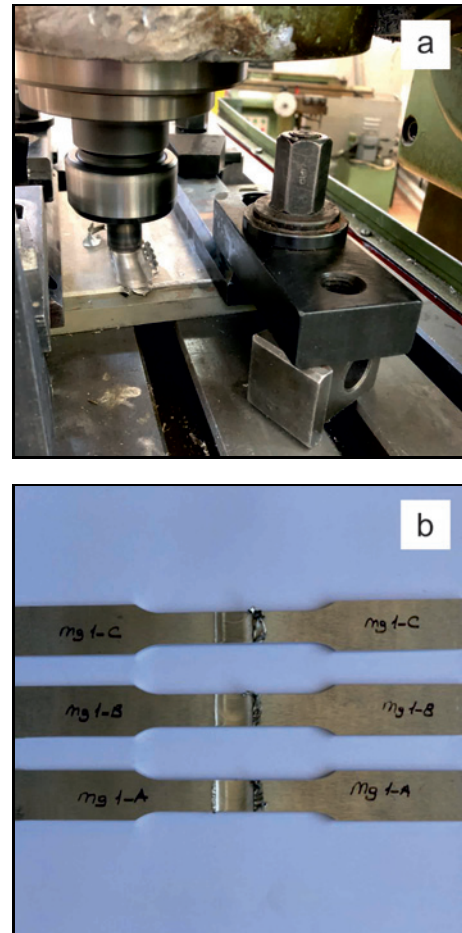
Images of (a) FSW process of AZ31B Mg sheets and (b) tensile test specimens.
